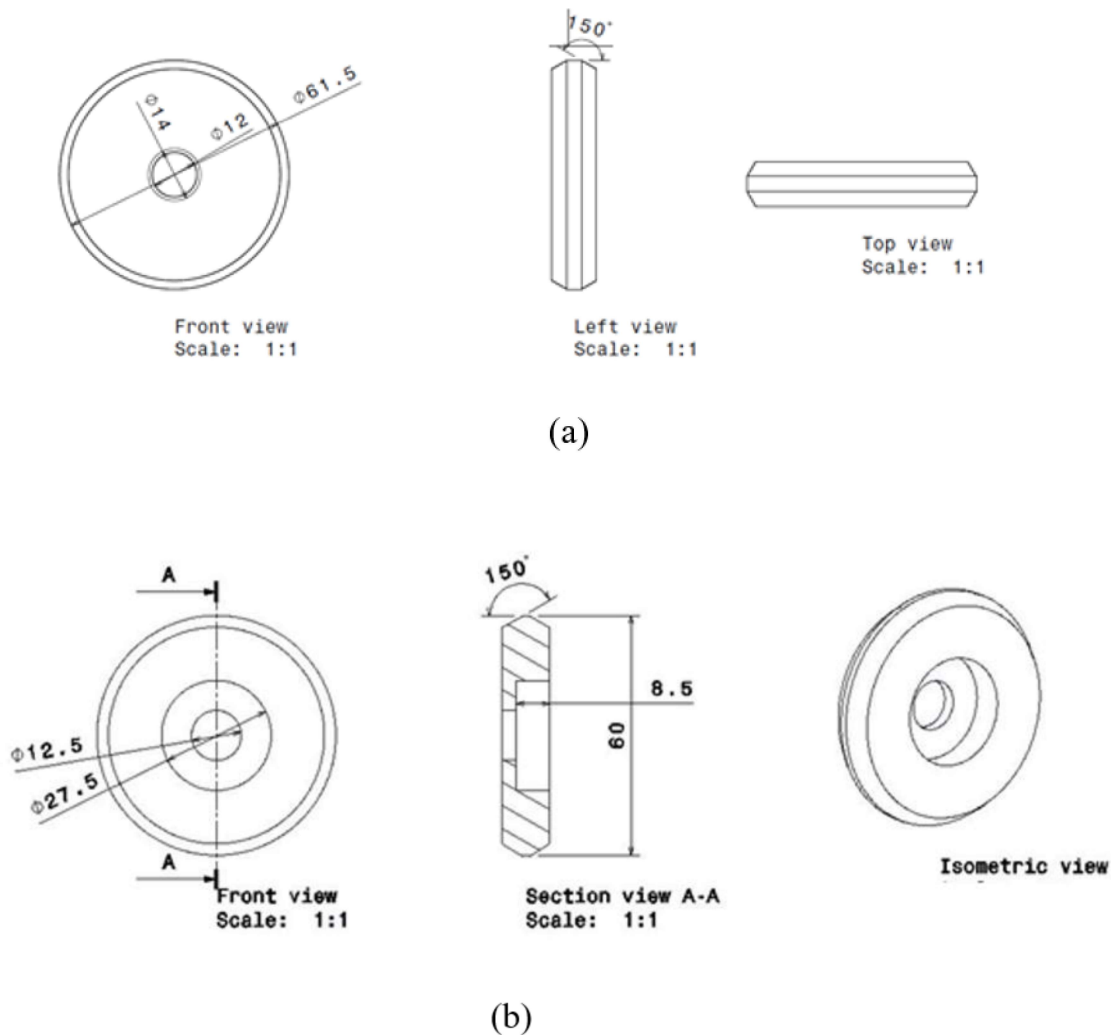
(a) Design of Roller (b) Modified design of roller
